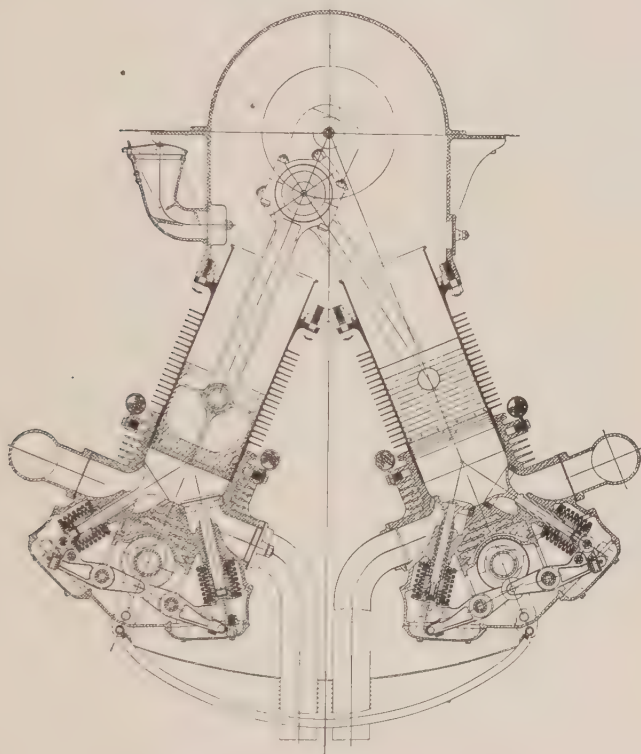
Air-cooled inverted Liberty engine, cross-section. (Courtesy Allison Engineering Co.)
